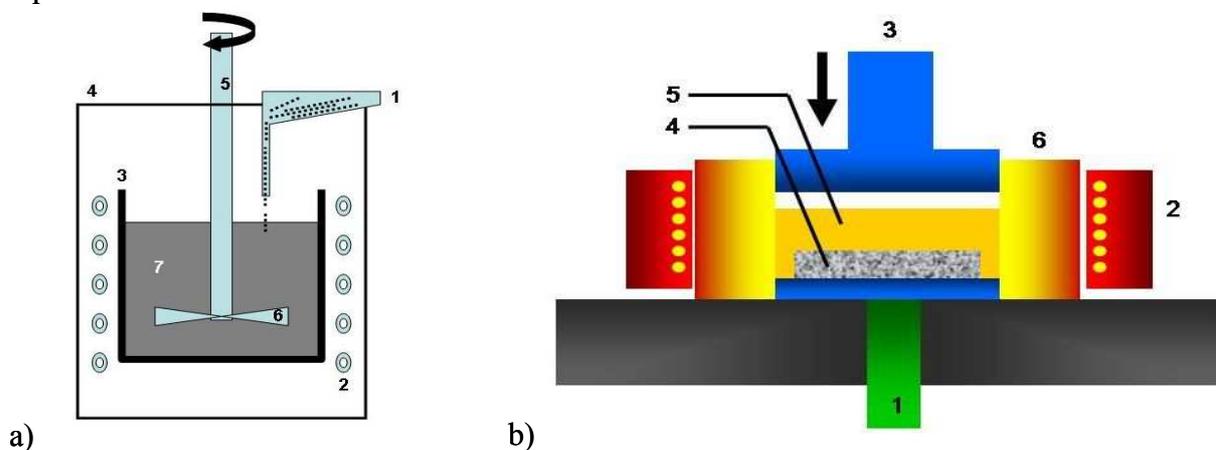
Sketch of a) the stir casting process and b) the squeeze casting process
